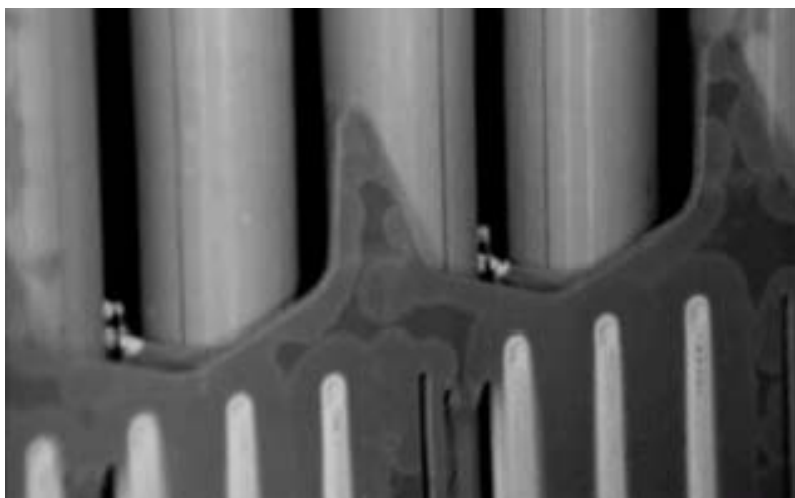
Weld joints of bottom end plugs, WLTA AA02-03, face 4.
